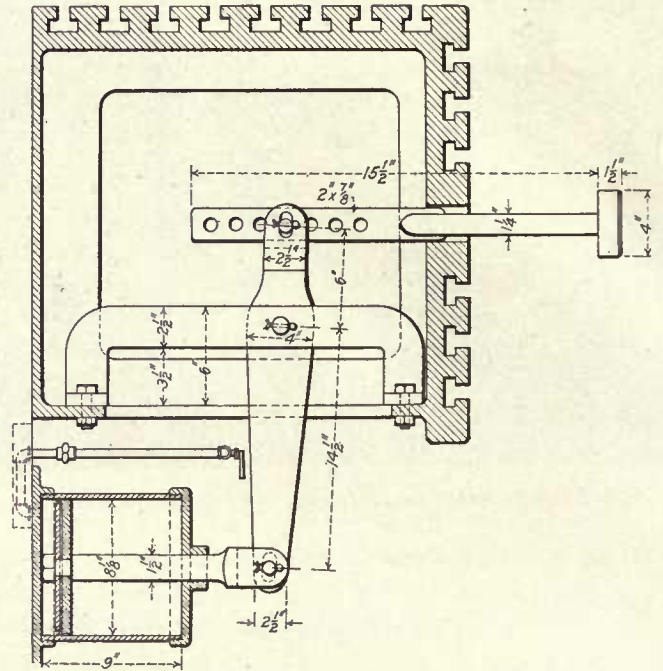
Pneumatic Clamp Applied to Drill Press.
